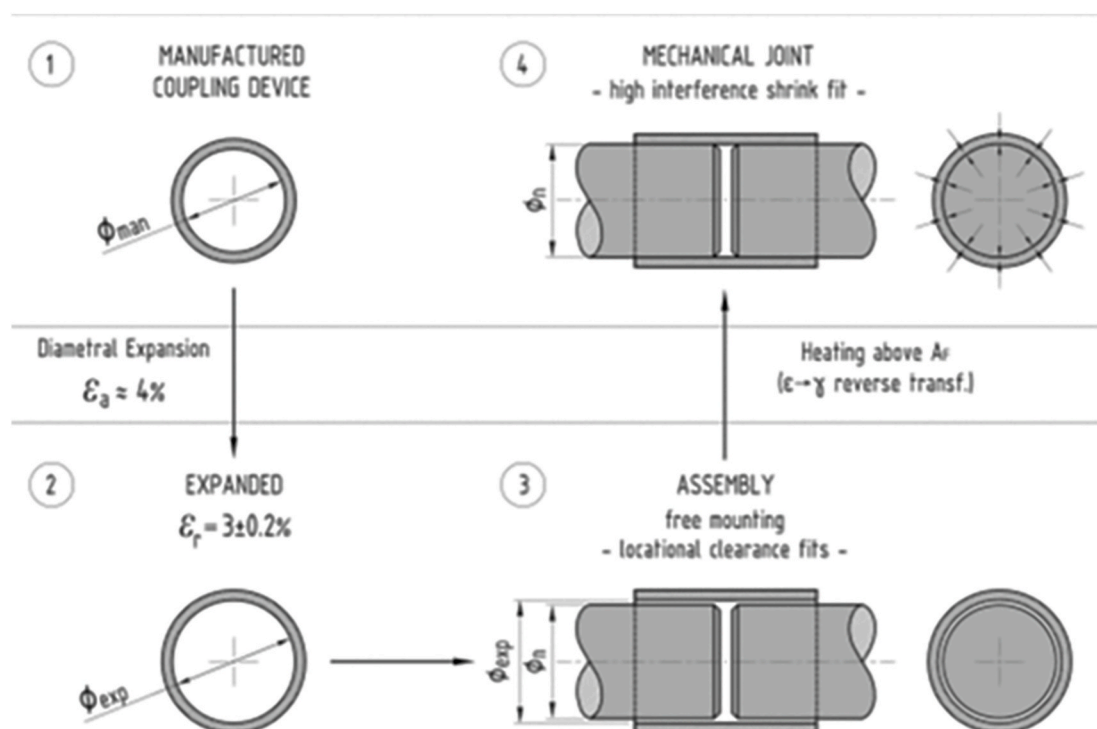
Graphical illustration of the process to establish the shape memory coupling.
